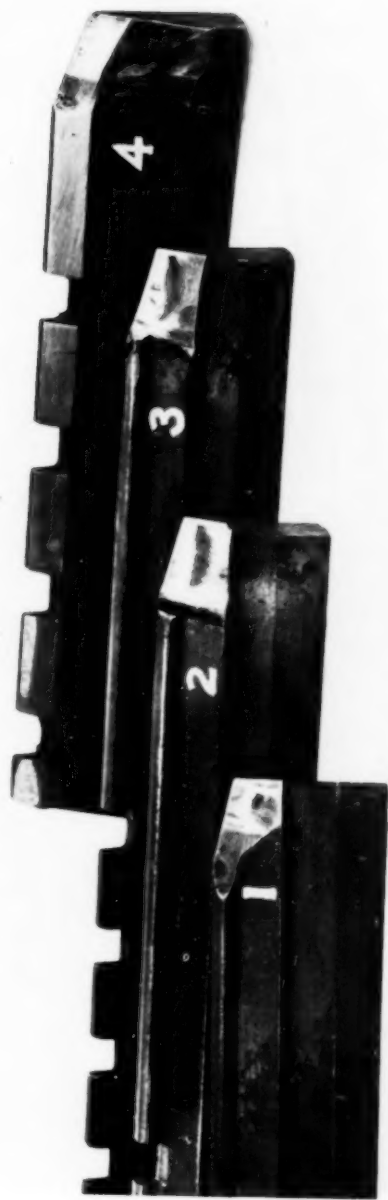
CUTTERS USED IN THE FLAT TURRET LATHE
